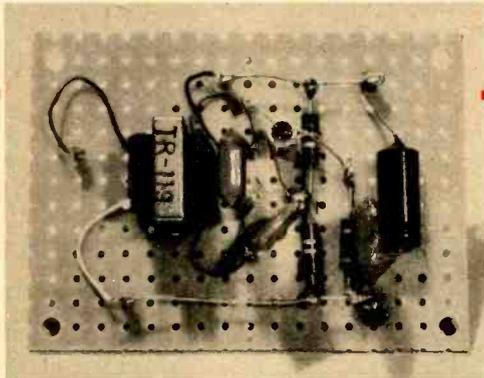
Modulator is built on a 2 7/16 x 3 3/8-in. piece of perforated board. Drill holes in corners and mating holes in cabinet bottom for mounting.
